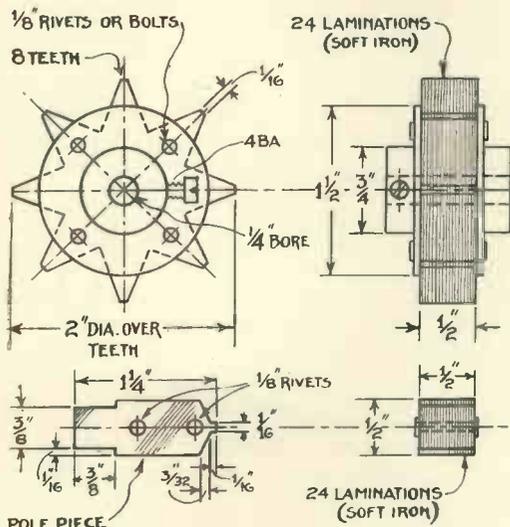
Constructional details of the 8-tooth phonic wheel and the magnet pole pieces.
